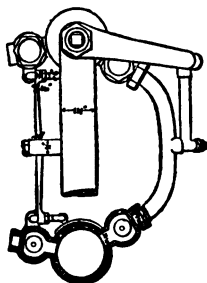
Kane-Pennington Gasoline or Explosive Engine (End View).
